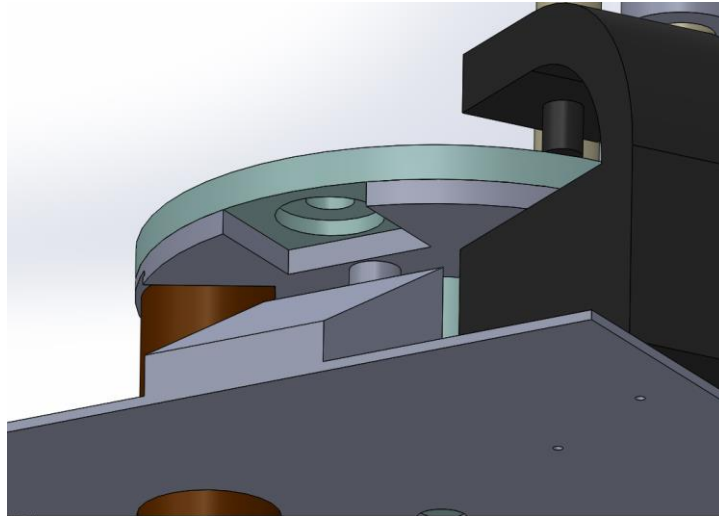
Rotary table cutout allowing assembled parts to drop out from bottom.
